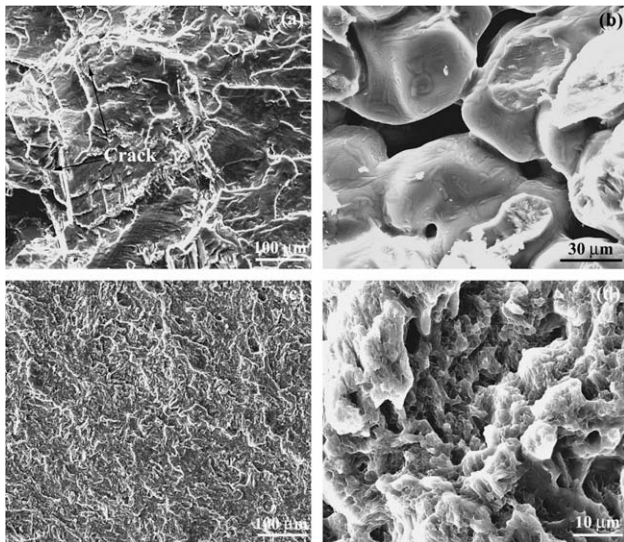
SEM fracture surfaces of fatigue-failed samples: rough surface with (a) cracks and (b) casting voids in as-cast sample (40 MPa); even surface without (c) cracks and (d) dimples in FSP sample (95 MPa).
